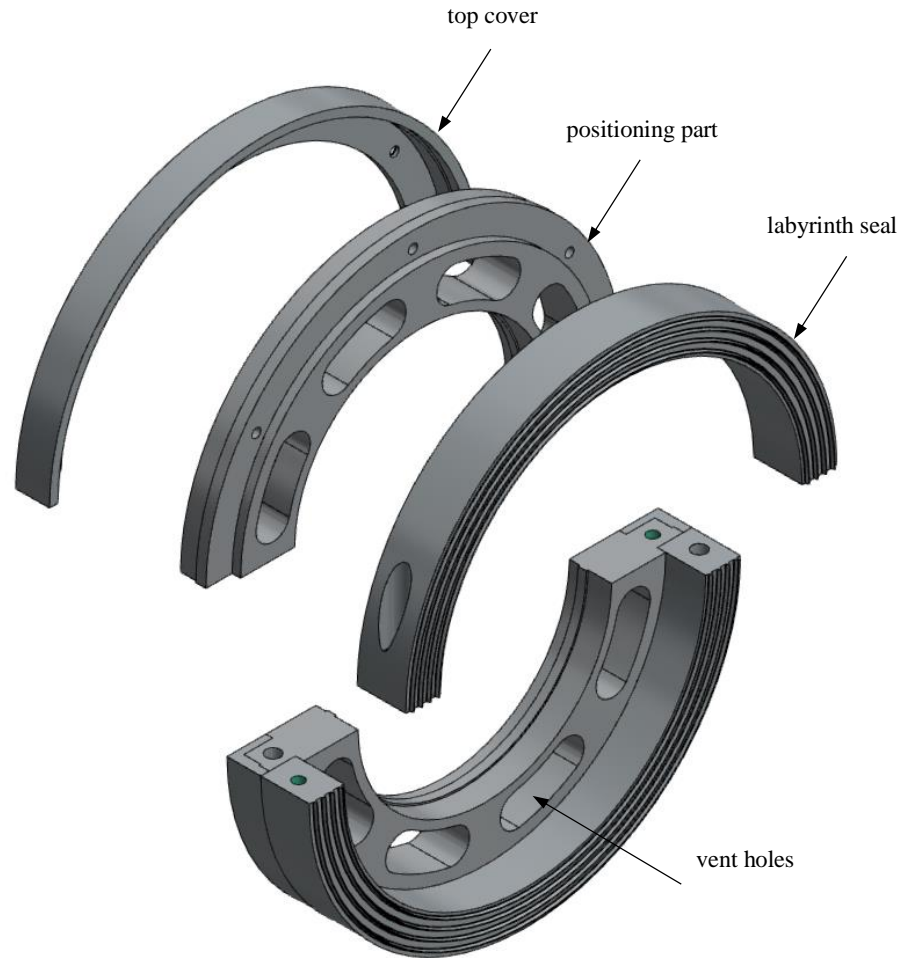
Exploded view of the secondary labyrinth seal subassembly.
